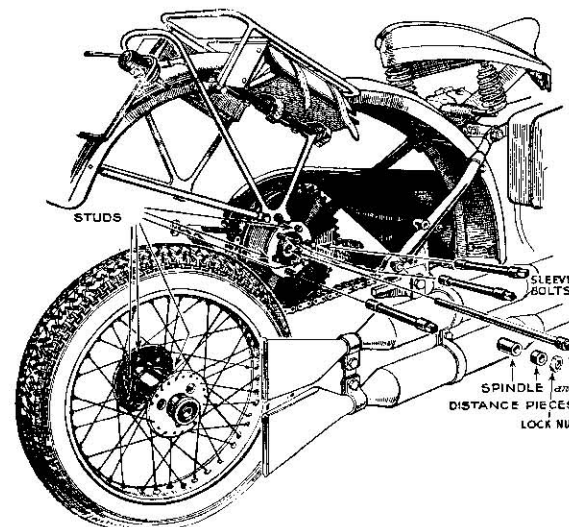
SHOWING ARRANGEMENT OF QUICKLY DETACHABLE REAR WHEEL AND HINGED MUDGUARD
